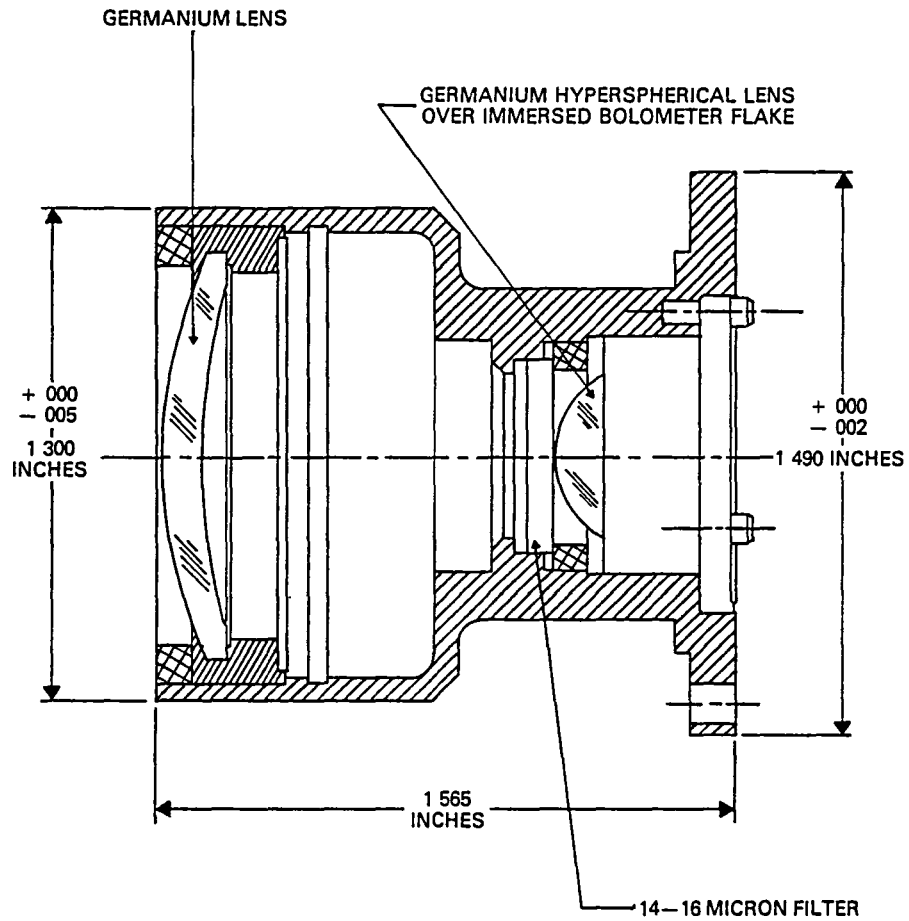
Barnes Engineering Company Bolometer Assembly for the AE and DE Series Spacecraft
